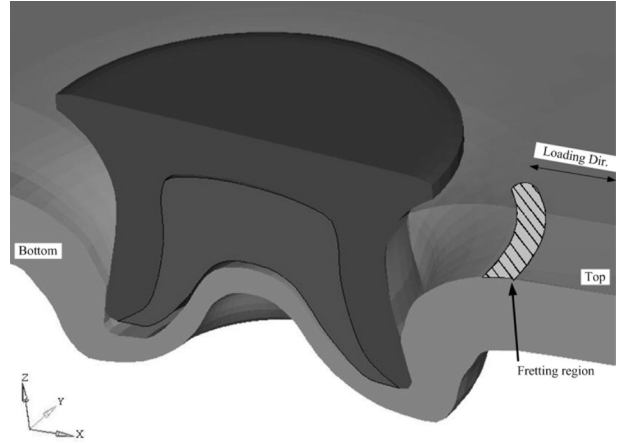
Fretting configuration for SPR joint under high-loading condition.
